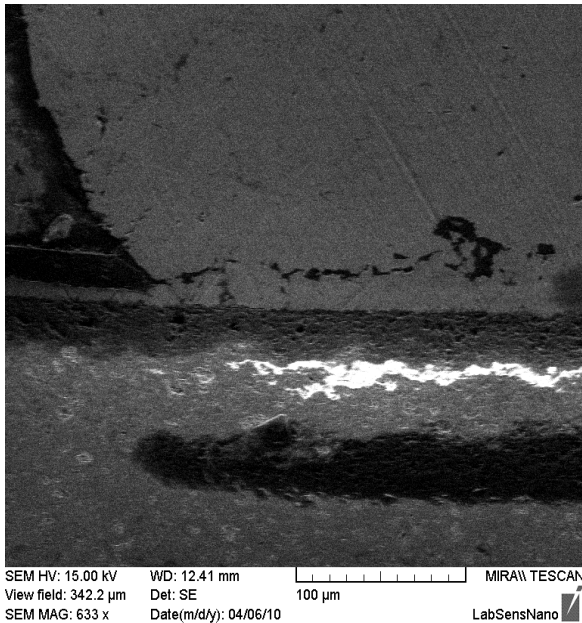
SEM image of crack in solder joint between solder ball and ceramic substrate
